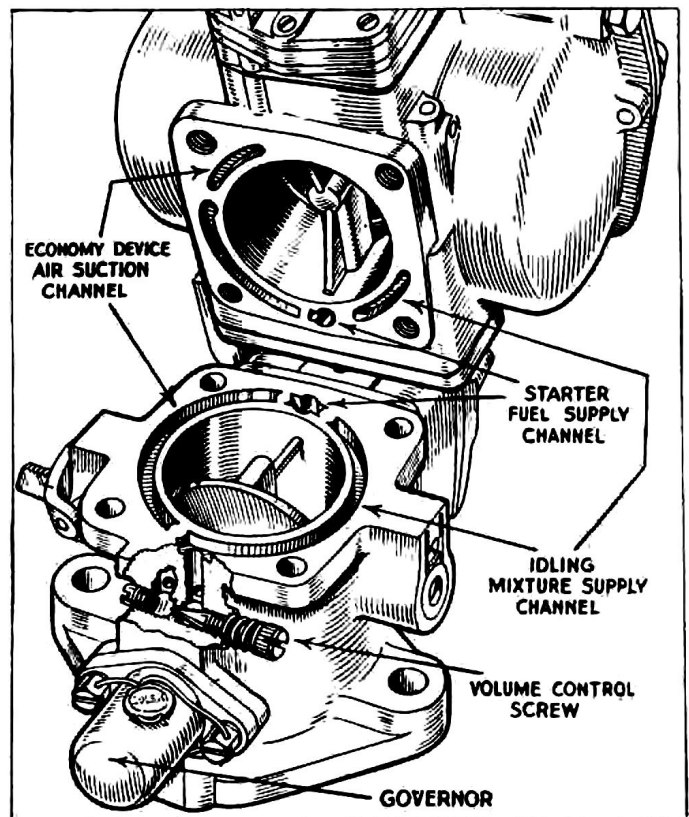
CARBURETTOR, TOP AND BOTTOM HALVES.
